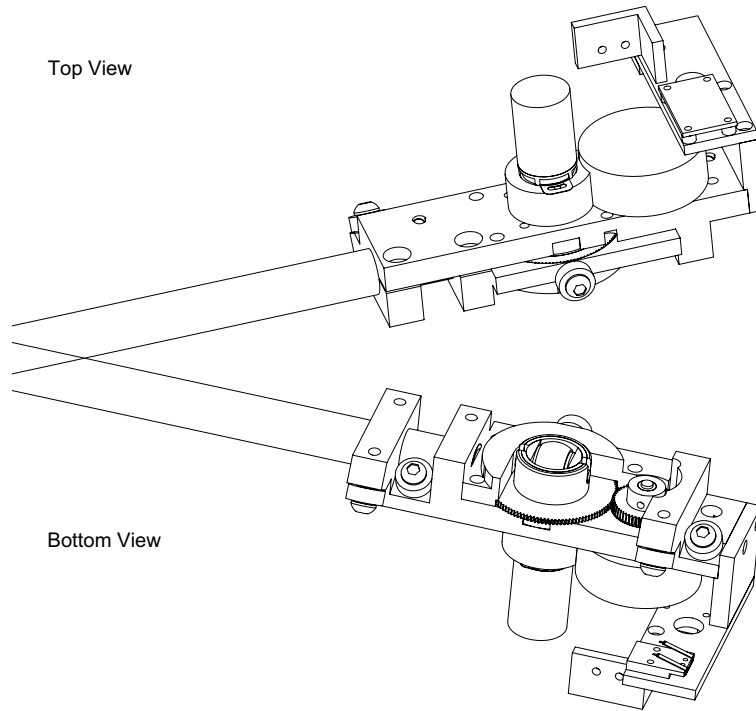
Top and bottom isometric views of a carriage and proximal link, which make up the moving portion of the linear actuation assembly.
